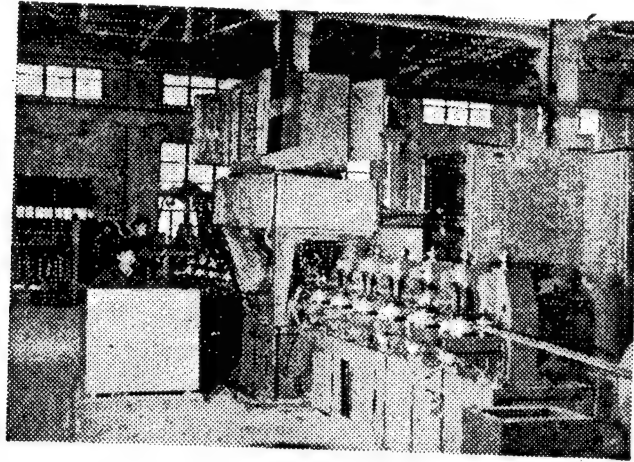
Photograph of a high-frequency aluminum pipe welding machine built by the Tianshui Electric Cable Plant
